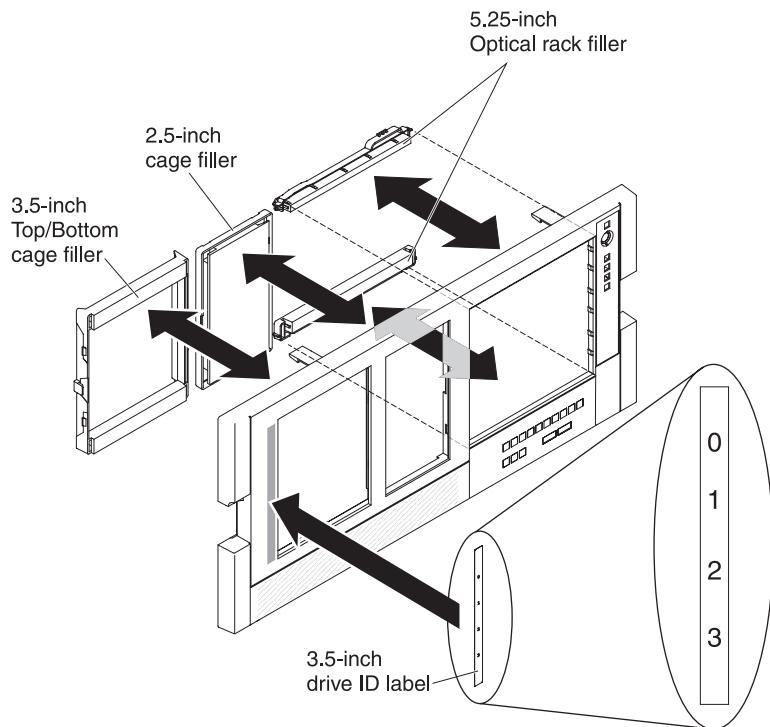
Installing the cage fillers and attaching the drive ID label (models with four 3.5-inch hard disk drives)
